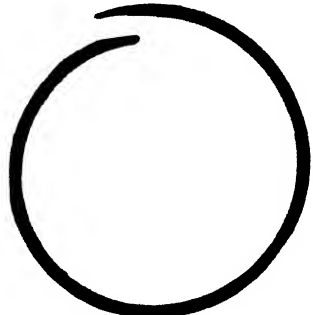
Cross section of skelp when rolled up preparatory to rolling into lap-welded pipe.
